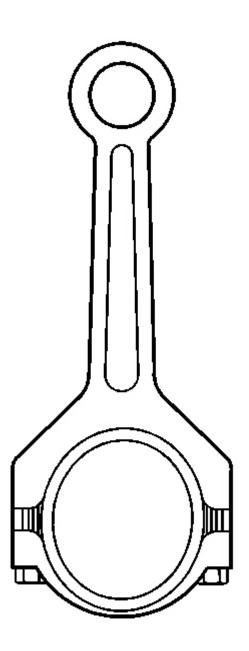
View Of Connecting Rod Courtesy of GENERAL MOTORS CORP.
